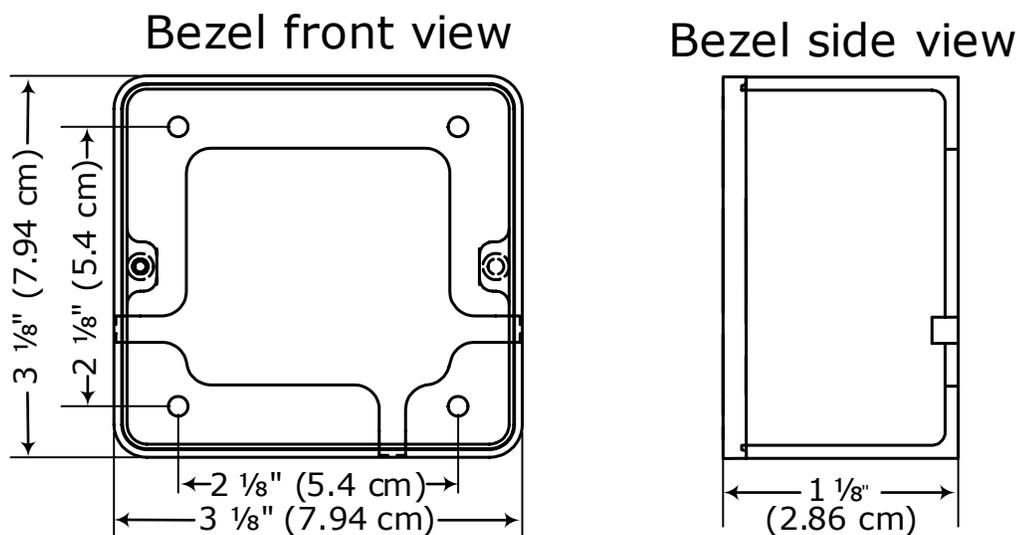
, Bezel Dimensions for a Surface Mounted Remote
